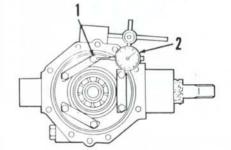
Use a dial indicator (2) to measure ring gear (1) backlash. Refer to text for adjustment.
